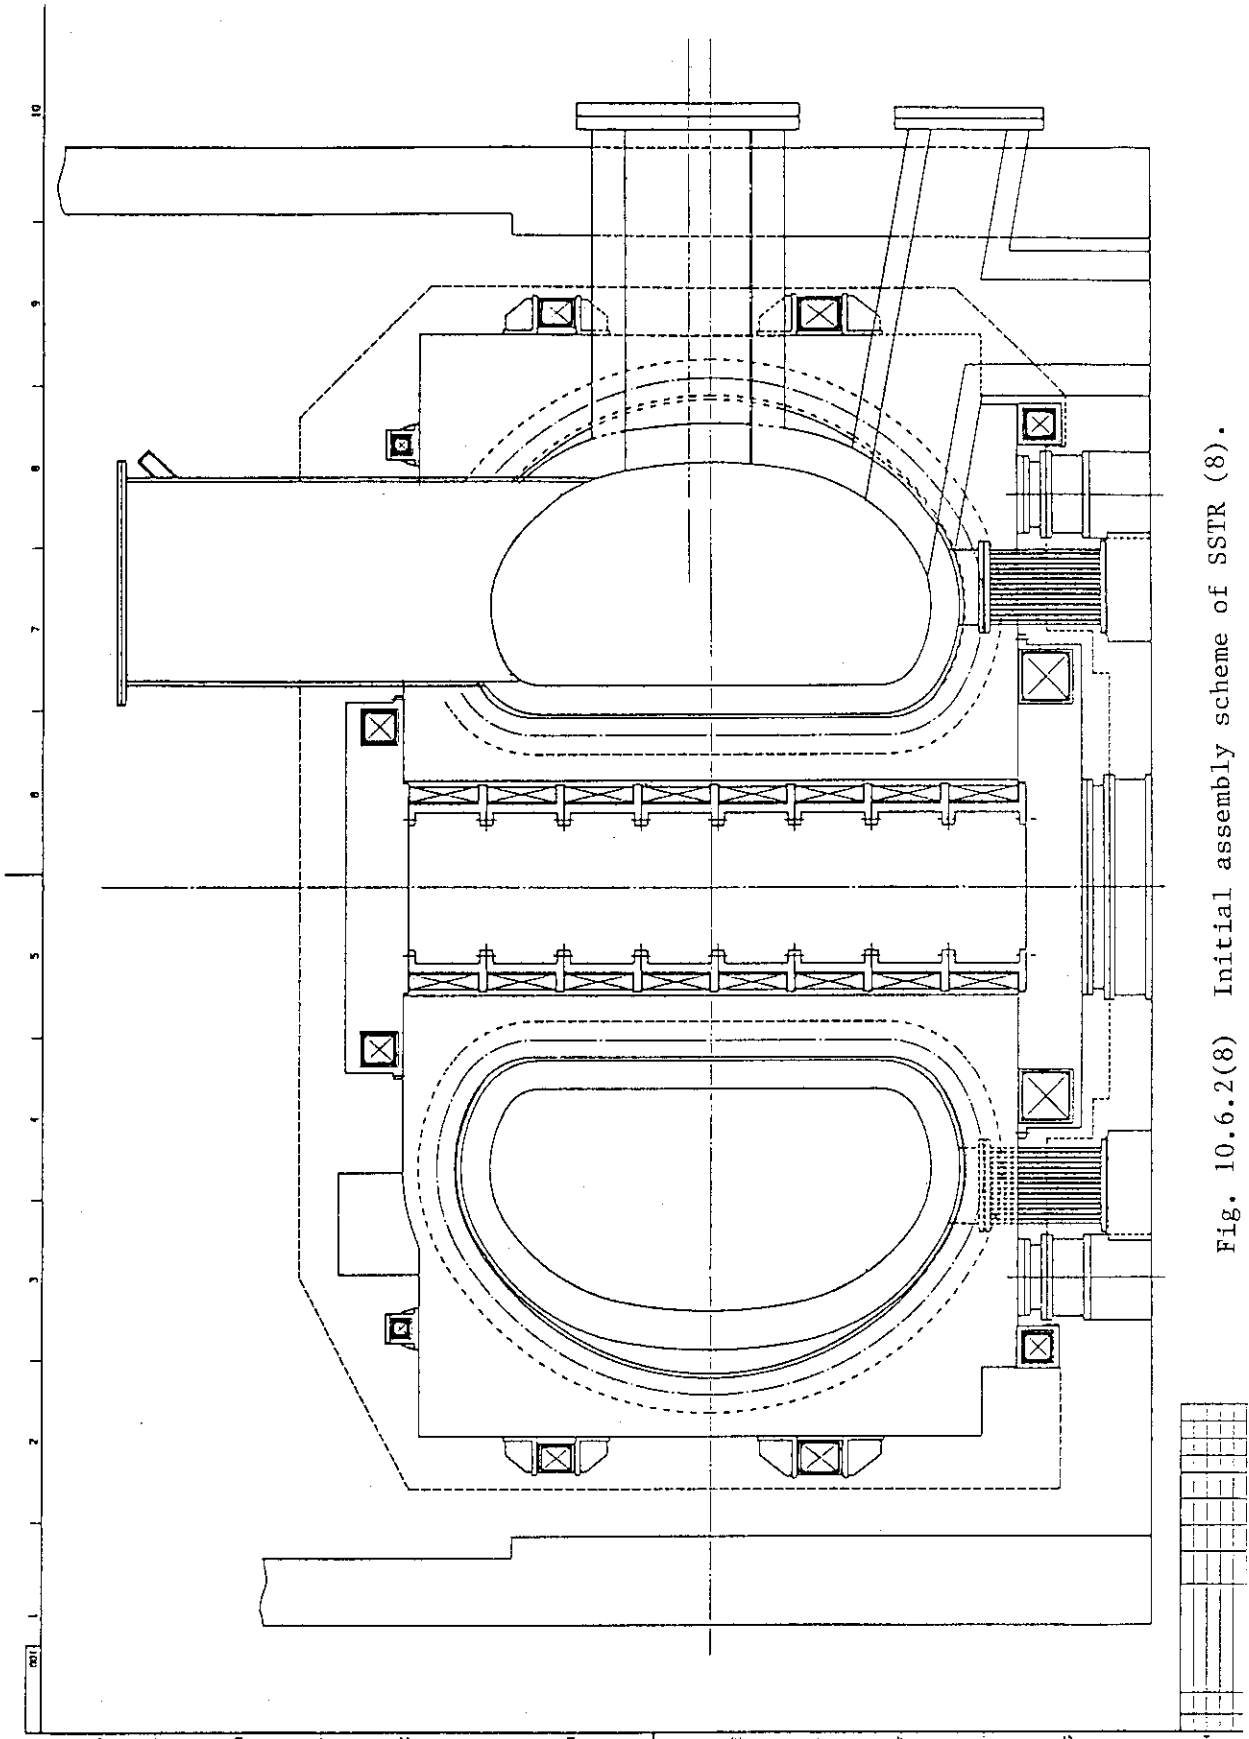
(8) Initial assembly scheme of SSTR (8).
